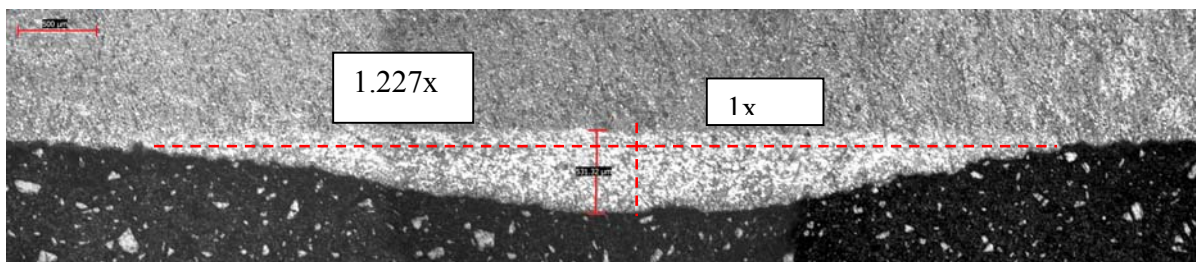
Cross section of cold sprayed sample showing dimensions.
